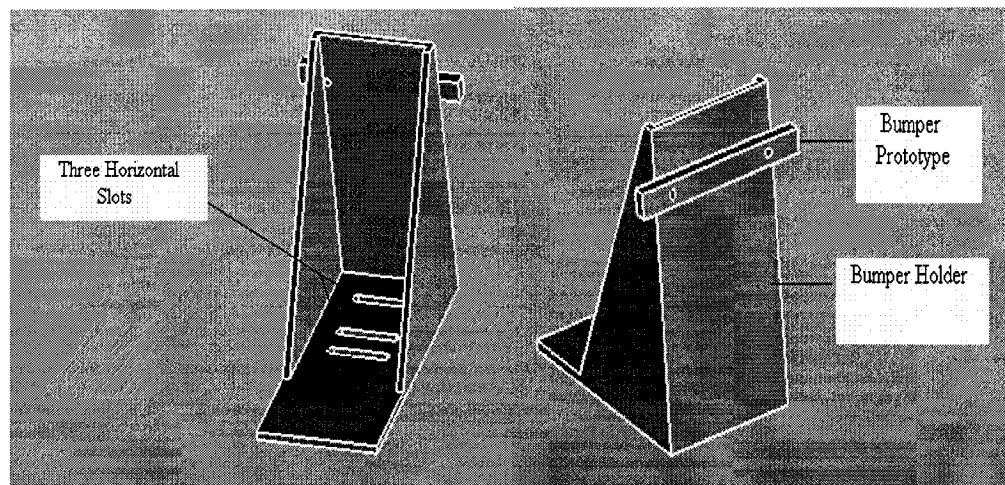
Model of Bumper Holder with Bolted Plexiglass Bumper.
